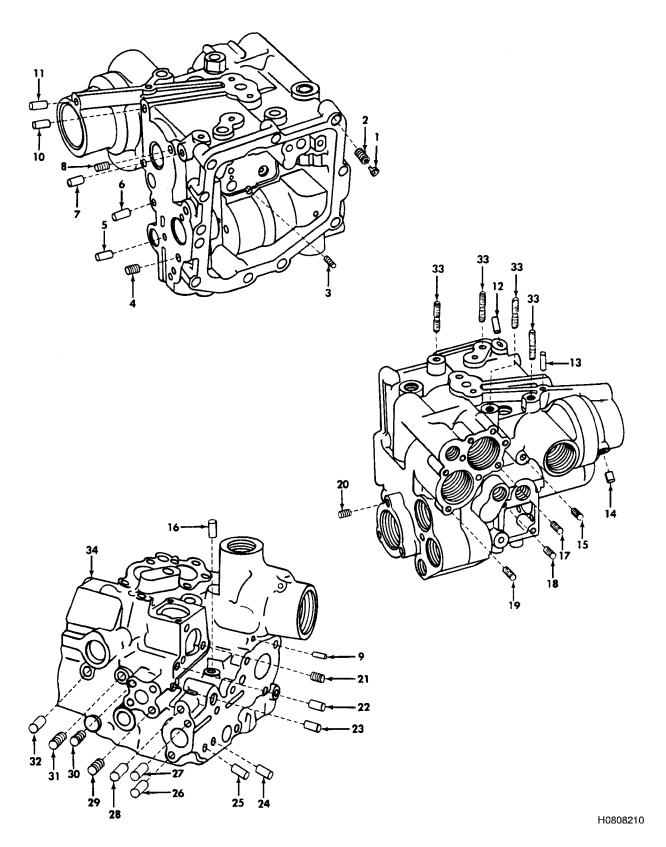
Control Housing Assembly (Sheet 1 of 2)
